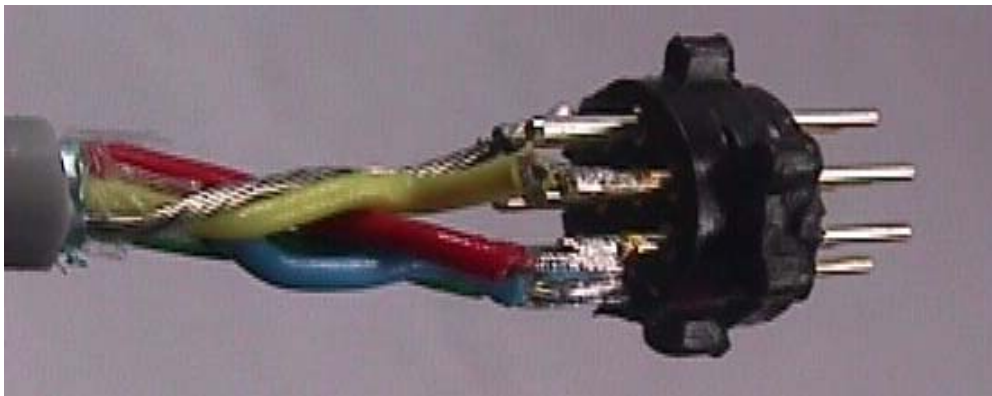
showing the 5 cable wires soldered to the 8-pin miniDIN male plug. These are:
